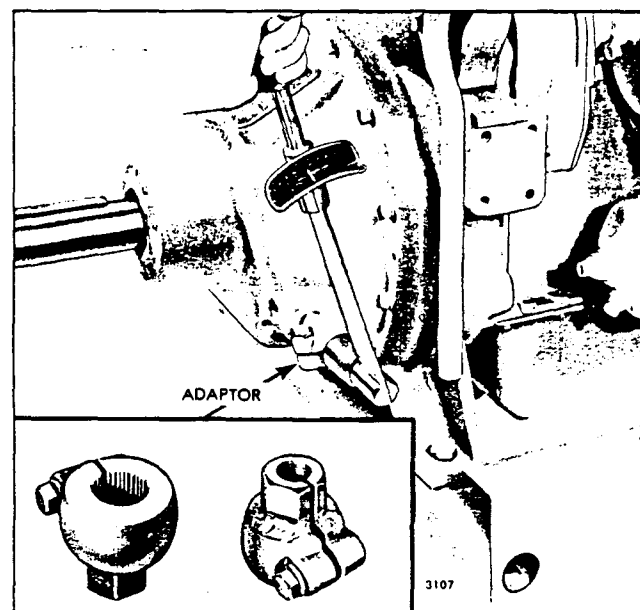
Checking Clutch Adjustment with a Torque Wrench and Adaptor
